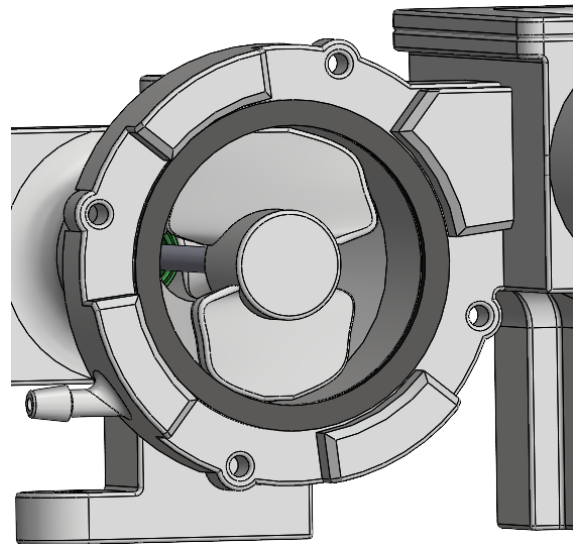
The impeller assembly inserted into the pump section of the water tunnel.
